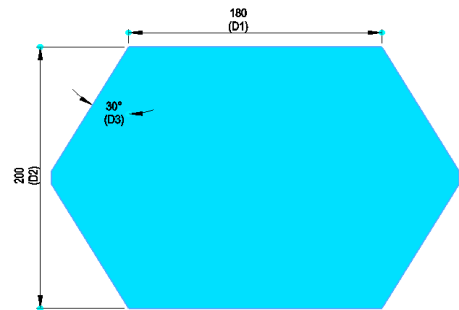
Overall dimensions of the heat exchanger (height: 120 mm).
